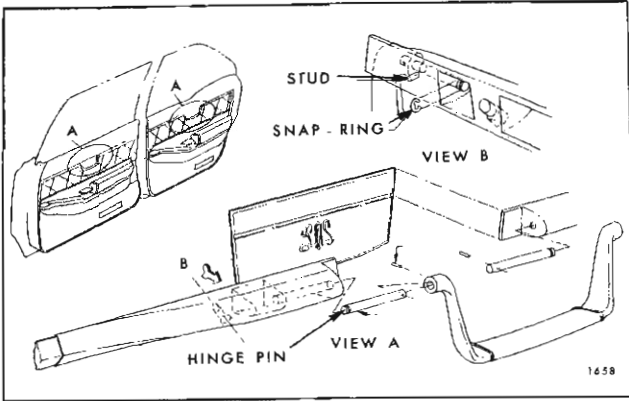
D10—Door Pull Handle Assembly - 38669 Style
